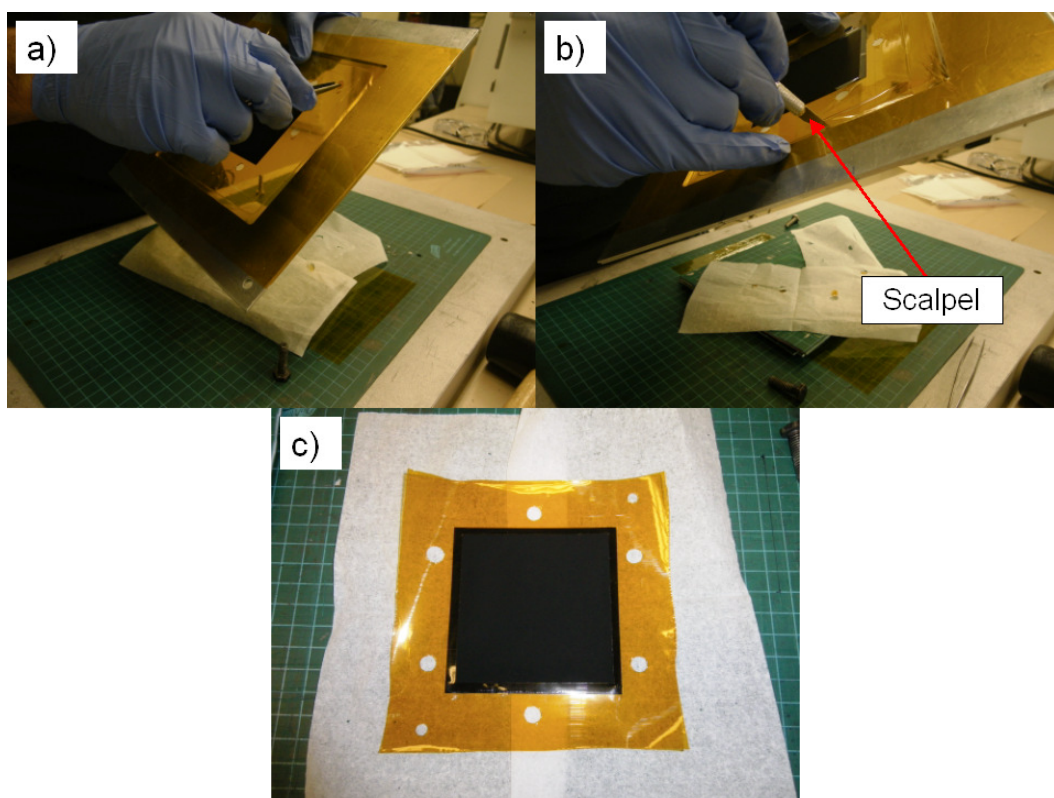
(a) Cleaning any leftover pieces of the polyimide film; (b) Cutting the outside edges of the polyimide film; and (c) final CCM and sub-gasket assembly.
